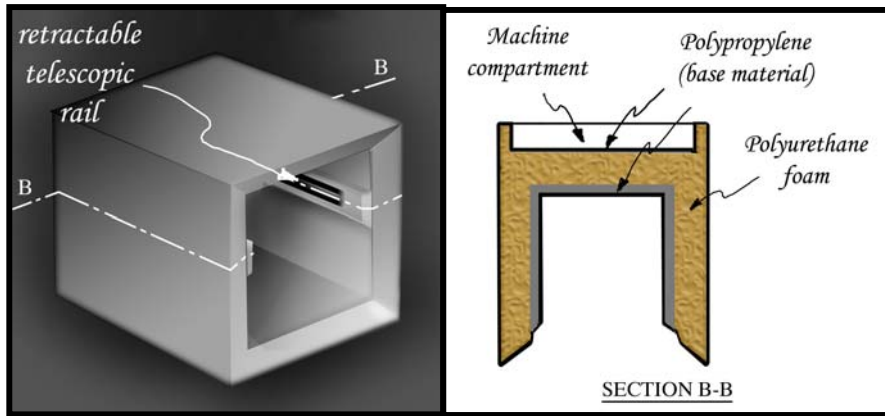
REFRIGERATOR BODY (SECTIONAL VIEW)
